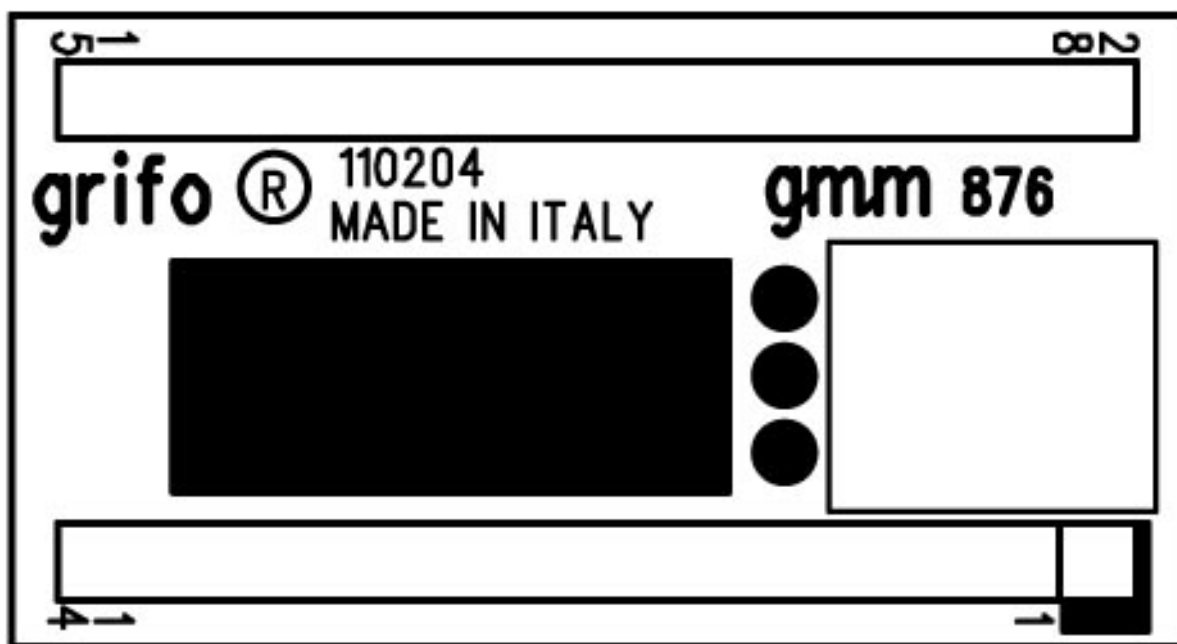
COMPONENTS MAP - SOLDER SIDE
